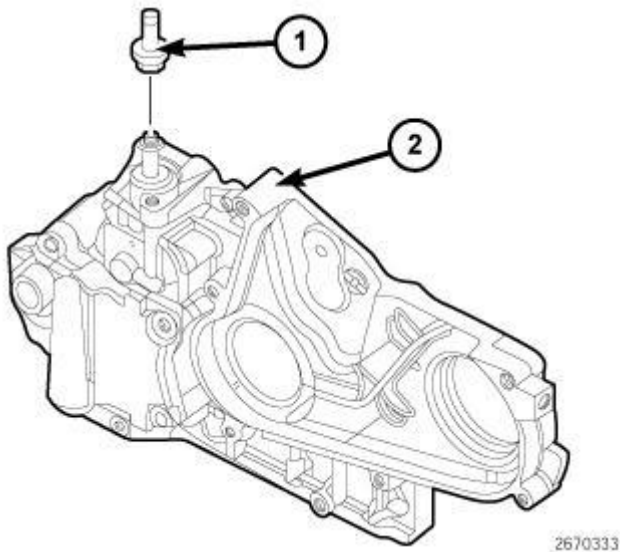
Vacuum Pump Check Valve & Front Engine Cover
